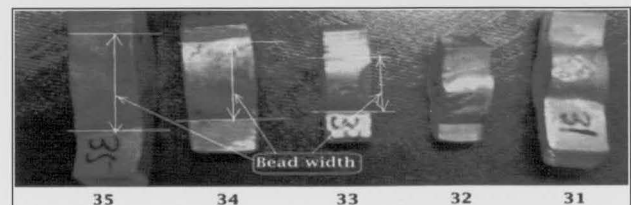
Bead width at welding speed of 150 mm/min.
